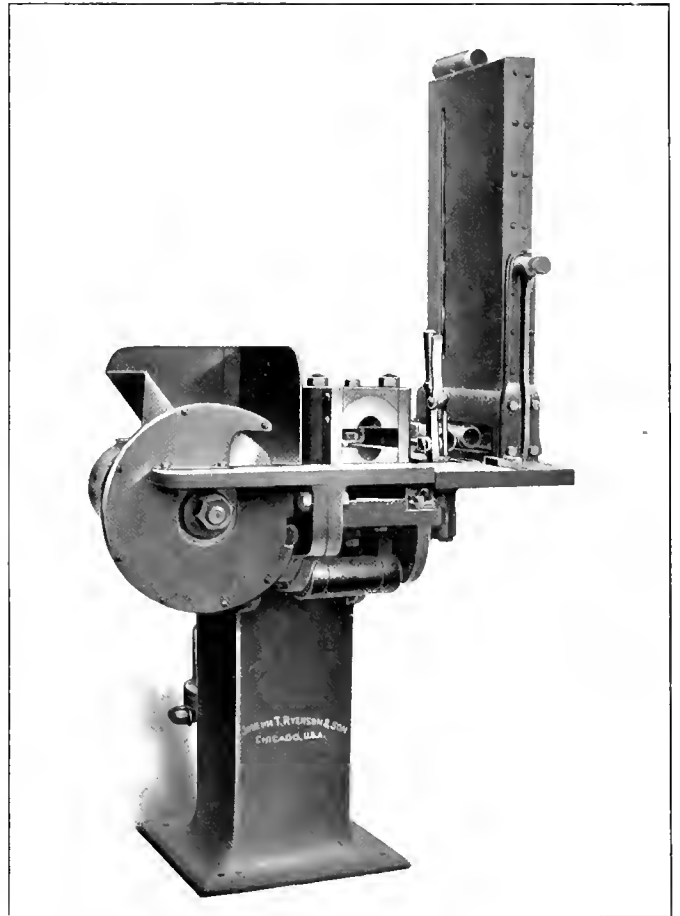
Hot Saw and Expander with Safe End Magazine.
